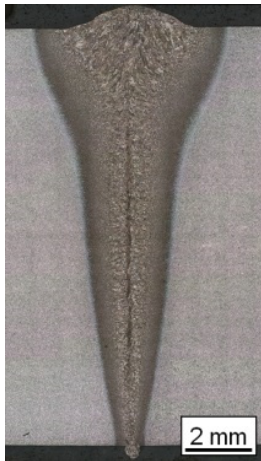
Macrostructure of electron beam welded joints made of steel S690QL, one run
